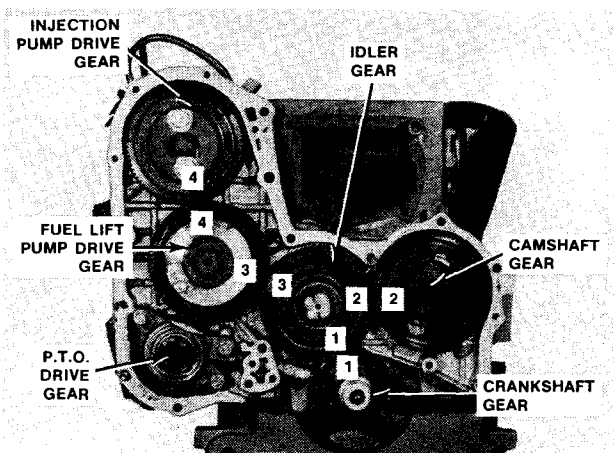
Phasing Timing Gears (SSD-327 and SSD-437)
